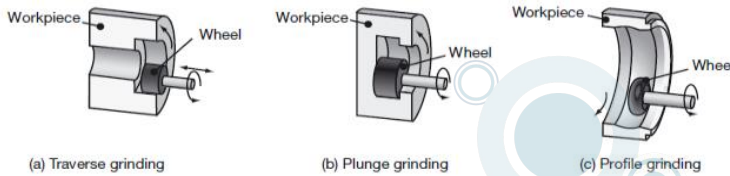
Schematic illustrations of internal-grinding operations.
